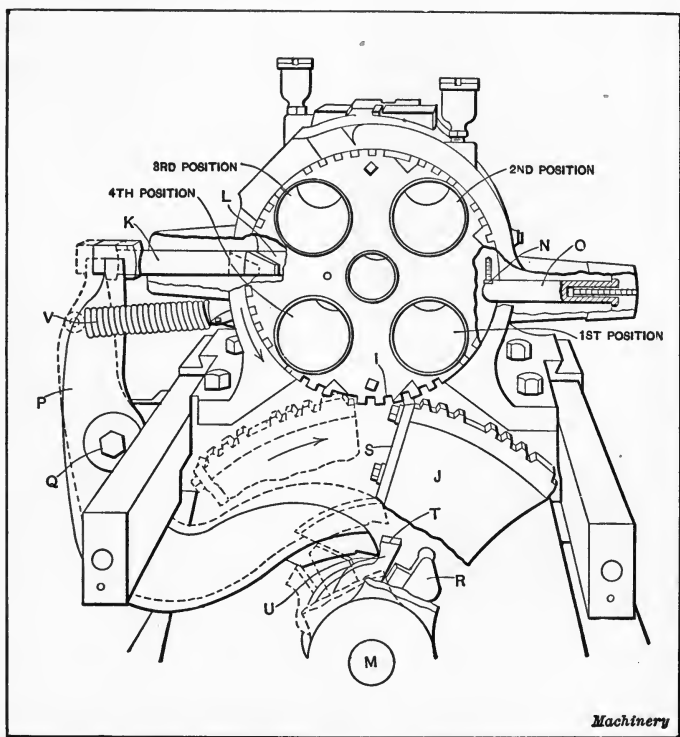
View showing how the Cylinder is indexed and locked in Position
